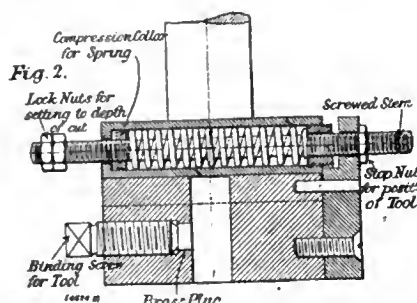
SECTIONAL DETAIL OF COMBINATION RECESSING AND FACING TOOL.
